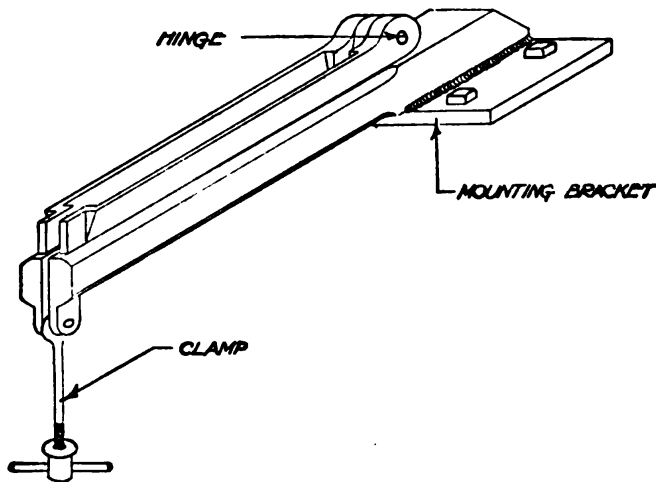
Welding jig for sheet metal butt joints.
